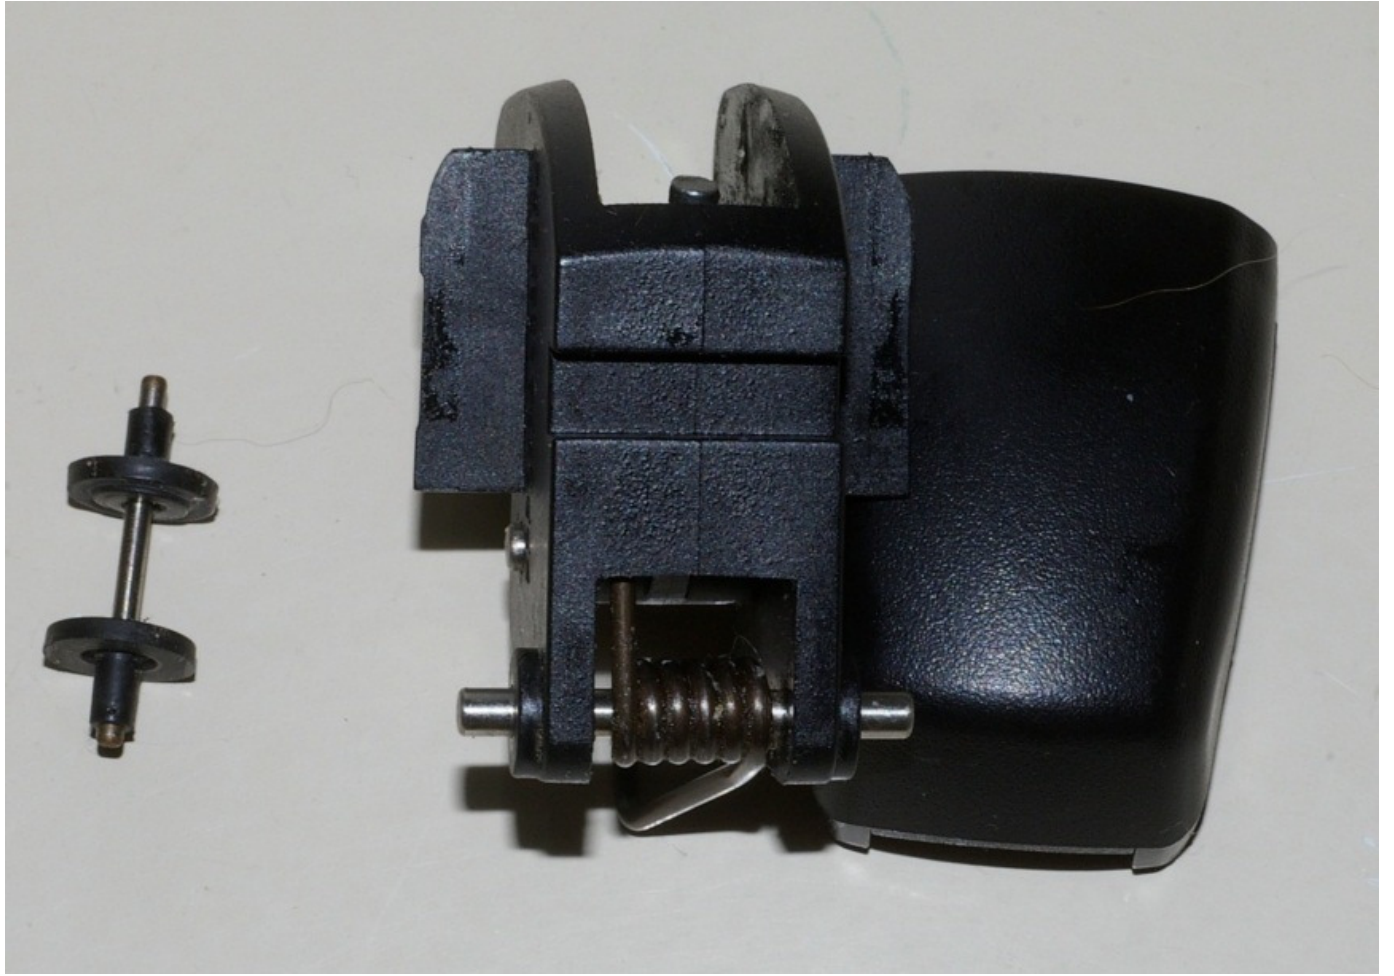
Both pins installed and ready to install assembly back in the shift knob cavity. Assembly is just a wedge fit in the knob cavity. The side tabs slide under the shelf tabs in the cavity and the bottom in a press fit to lock it all in place.
